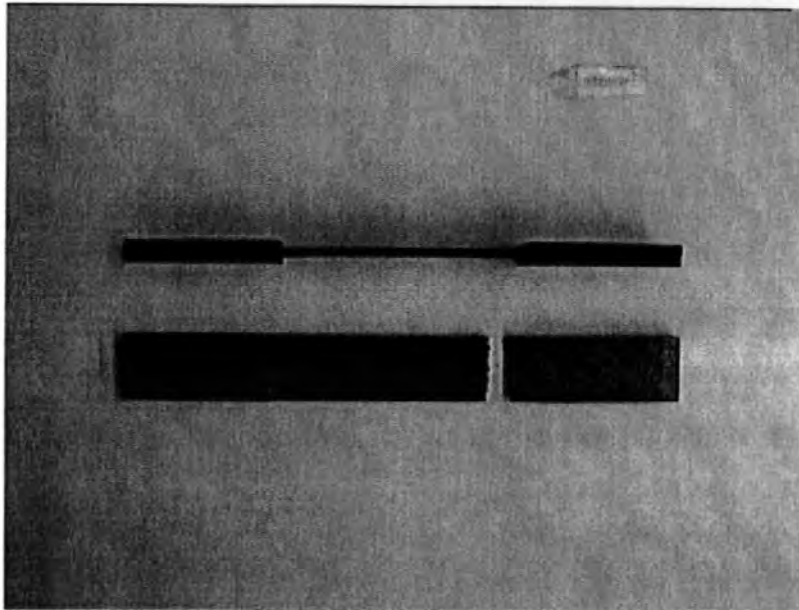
Failed tensile test coupon (intact coupon shown to indicate failure location)
